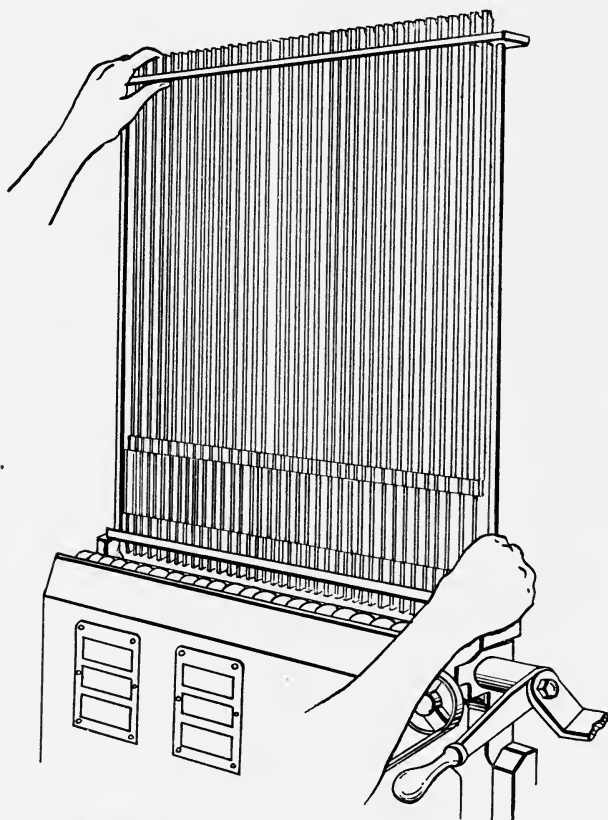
Showing Easy Method of Removing the Key Rods by lifting out the keyboard key rod frame on machines A, B, C, D and X, after having disconnected the spaceband key lever key rod and taking out the two front screws in the upper key rod guide.
